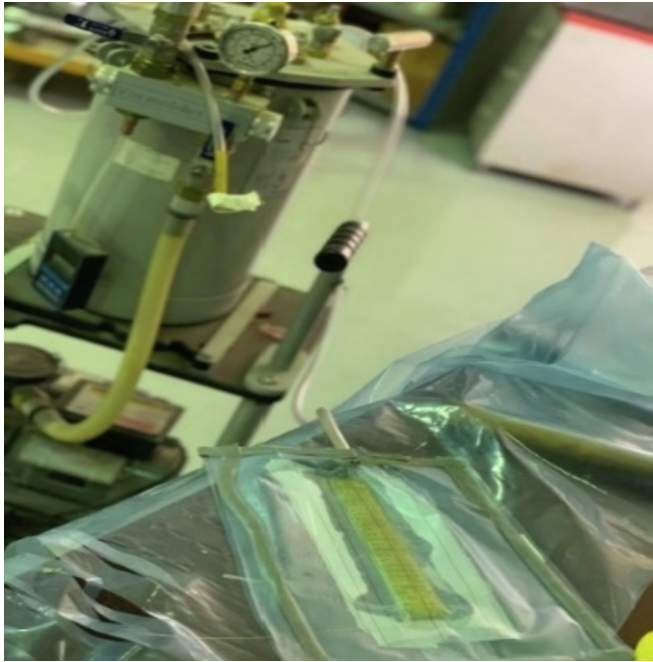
(a) Vacuum-assisted resin transfer molding.
